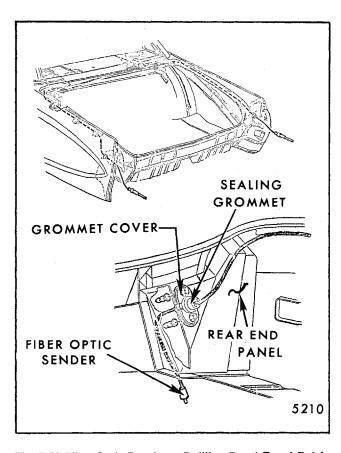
Fiber Optic Routing - Cadillac C and E and Buick C Styles
